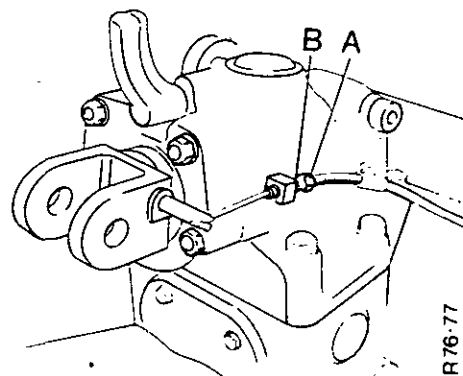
CABLE FOR THE SENSING UNIT SETTING
